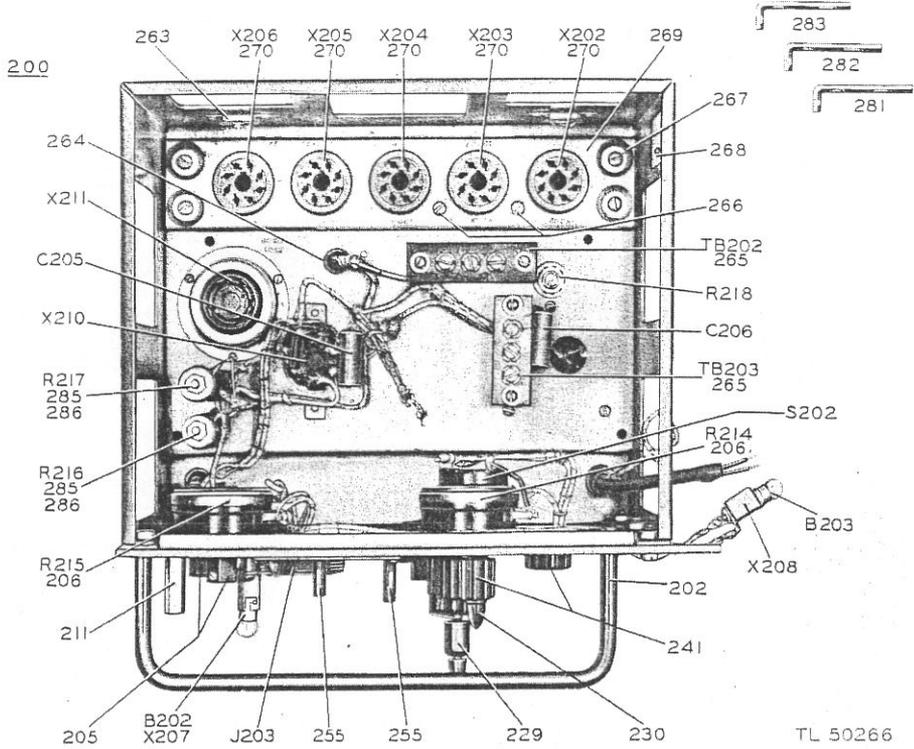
Recorder-Scanner BC-918-B, removed from case (top view—gear housing, motor and optical system removed)
